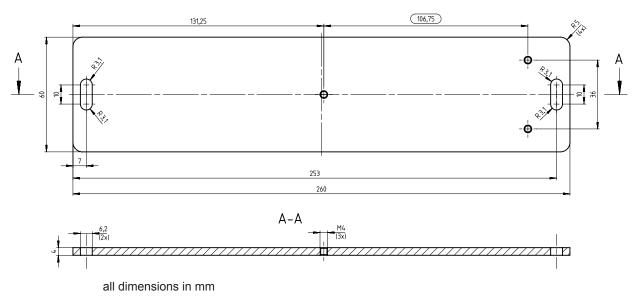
Mounting plate BT-MSI-MD\_FB
